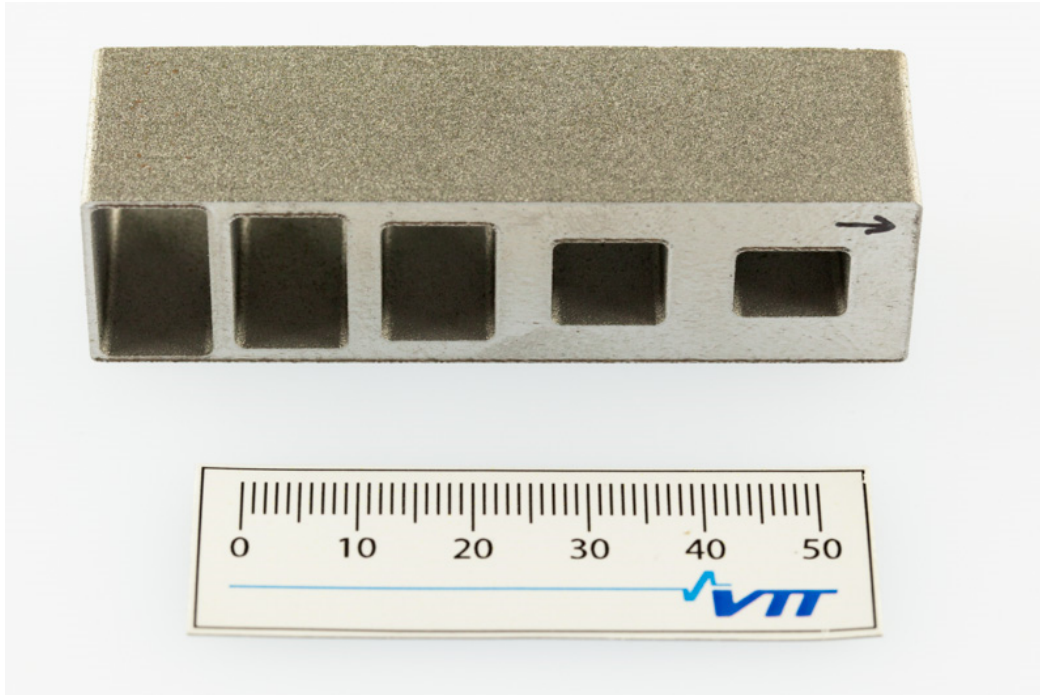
Rectangular holes test print in H13 tool steel at 30 μm layer thickness. No defects or distortions were noted.
